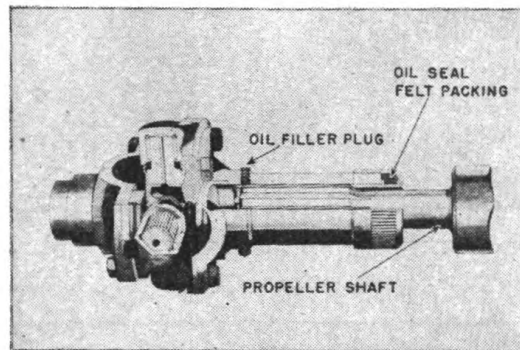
Oil sealed type universal joint using heavy-bodied fluid lubricant.
